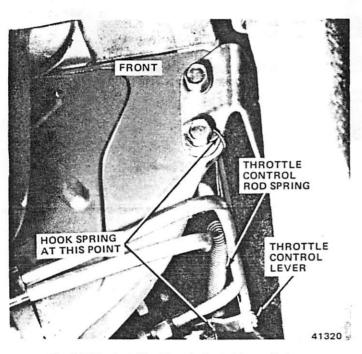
C-30 Installing Throttle Control Lever Spring— Six-Cylinder Engine
